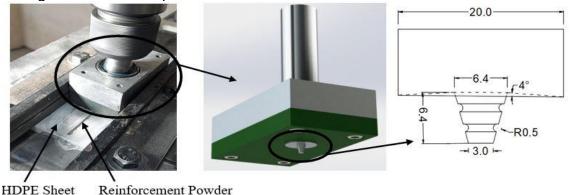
Stationary Shoe Tool System with Shoulder and Pin Geometry (dimensions are in millimeter)
